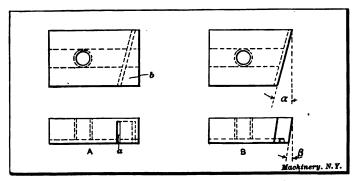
Type of Shaving Tool used in the Shaving-tool Holder shown in Fig. 29
